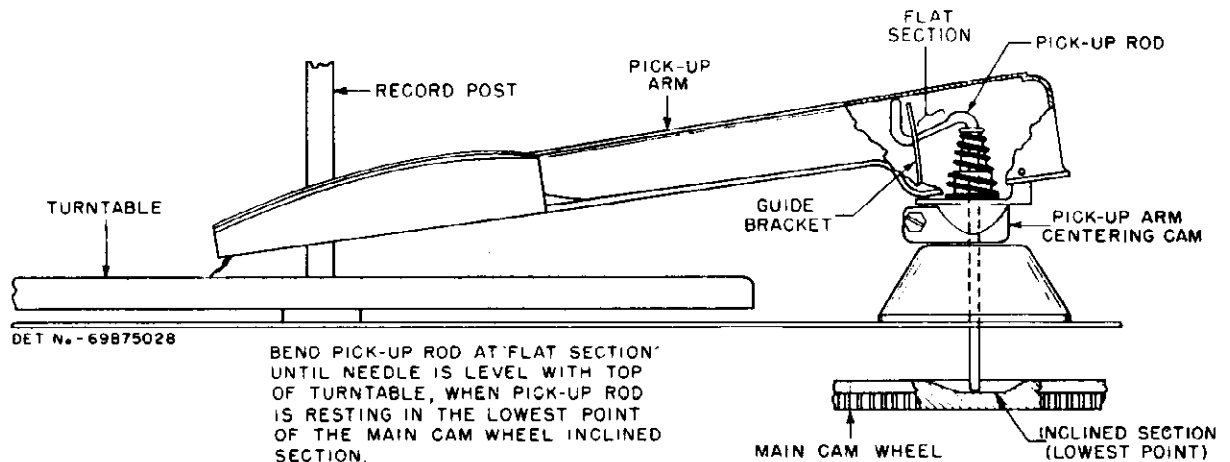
PICK-UP ARM VERTICAL ADJUSTMENT DETAIL
